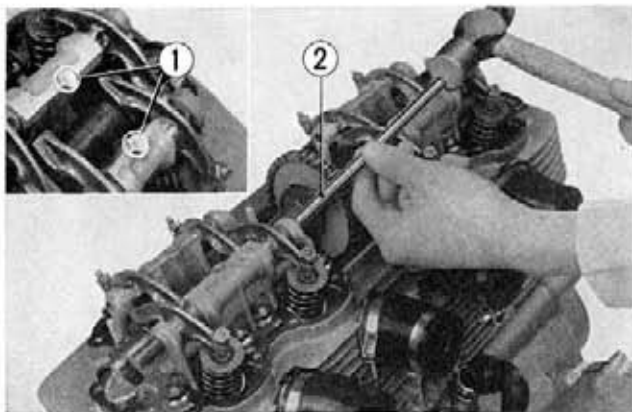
① Rocker arm shaft mounting bolts
